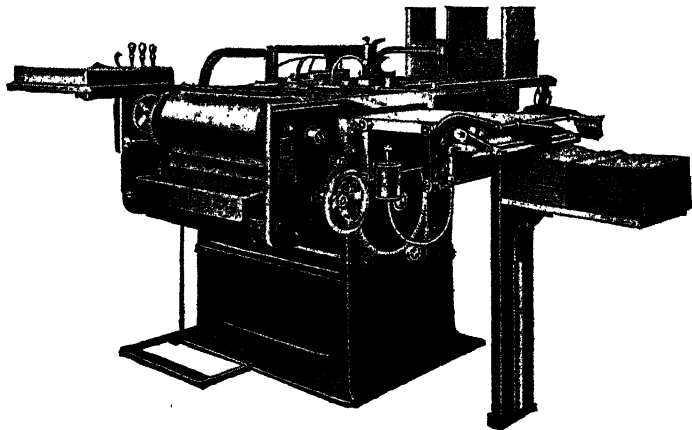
NO. 2 "SMYTH" CASE-MAKING MACHINE.
